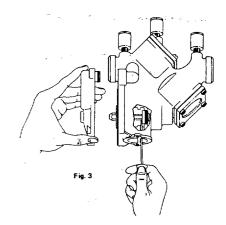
To assemble the Relief Valve Assembly have a screwdriver ready.
